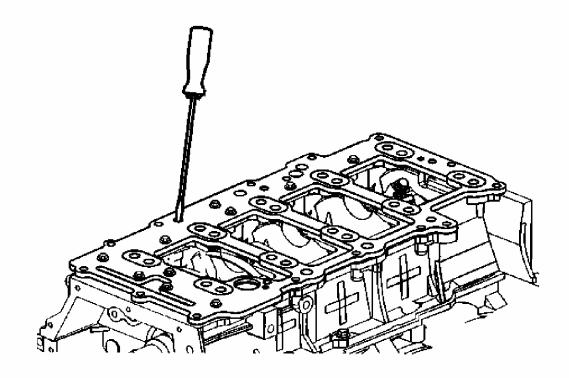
Cleaning Out Sealant In Oil Drain Back Passages Courtesy of GENERAL MOTORS CORP.
